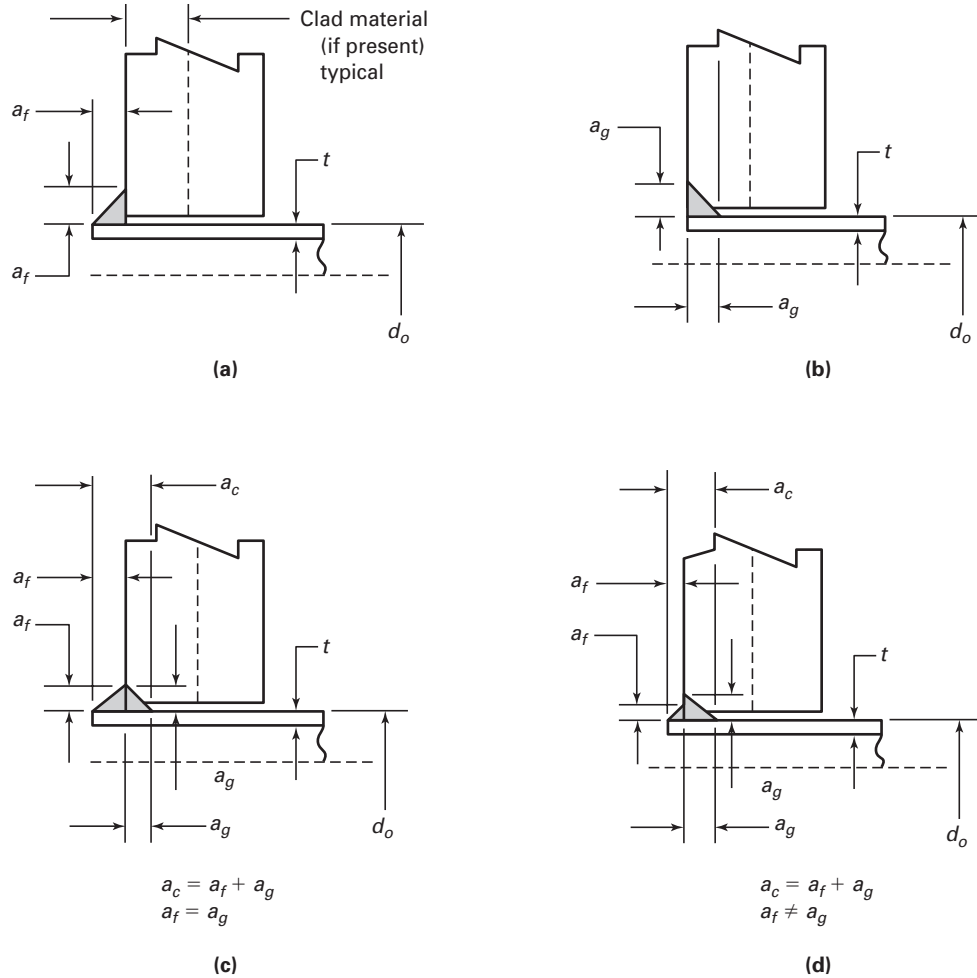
SOME ACCEPTABLE TYPES OF TUBE-TO-TUBESHEET STRENGTH WELDS
